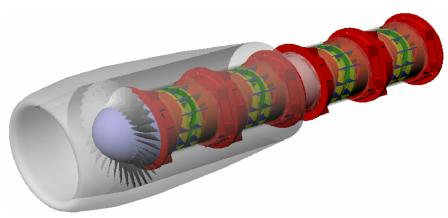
Solid model of PAX 50 axial vane hybrid engine assembly.
